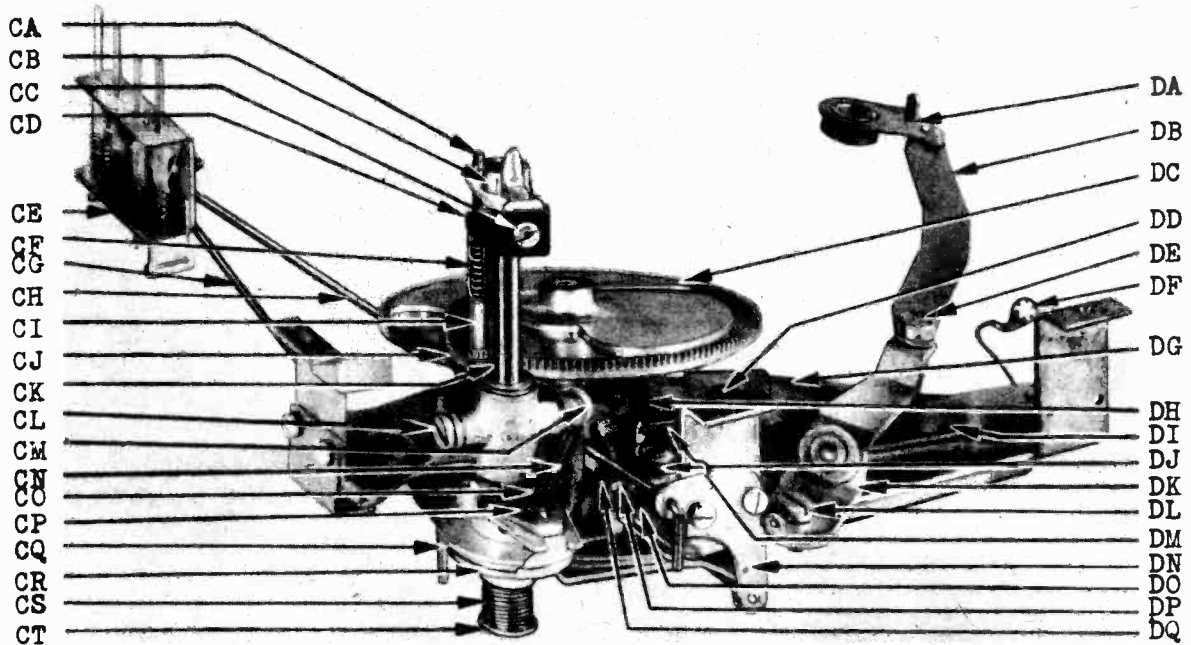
PHOTO C-D. View of Sub-Plate Assembly, Together with Certain Other Assemblies.
